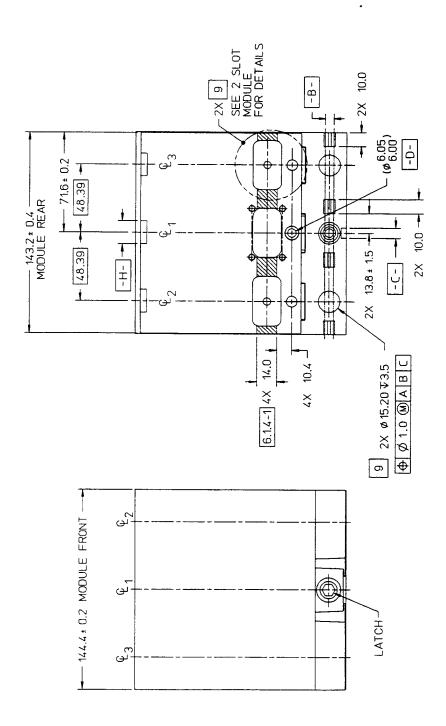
, 3 SLOT MODULE FRONT & REAR DETAILS
